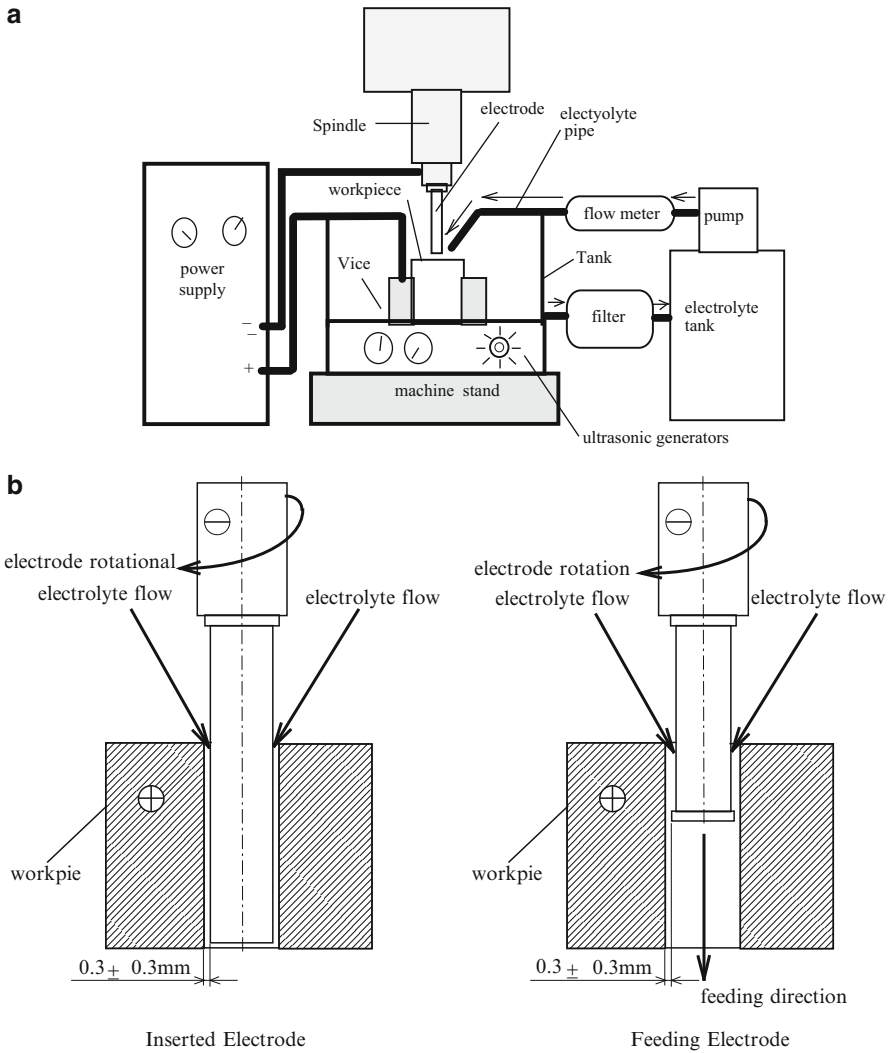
Experimental setup of ultrasonic-aided electropolishing of holes. (a) System schematics. (b) Configuration of tool and workpiece ([66, 67], reprinted with permission)
